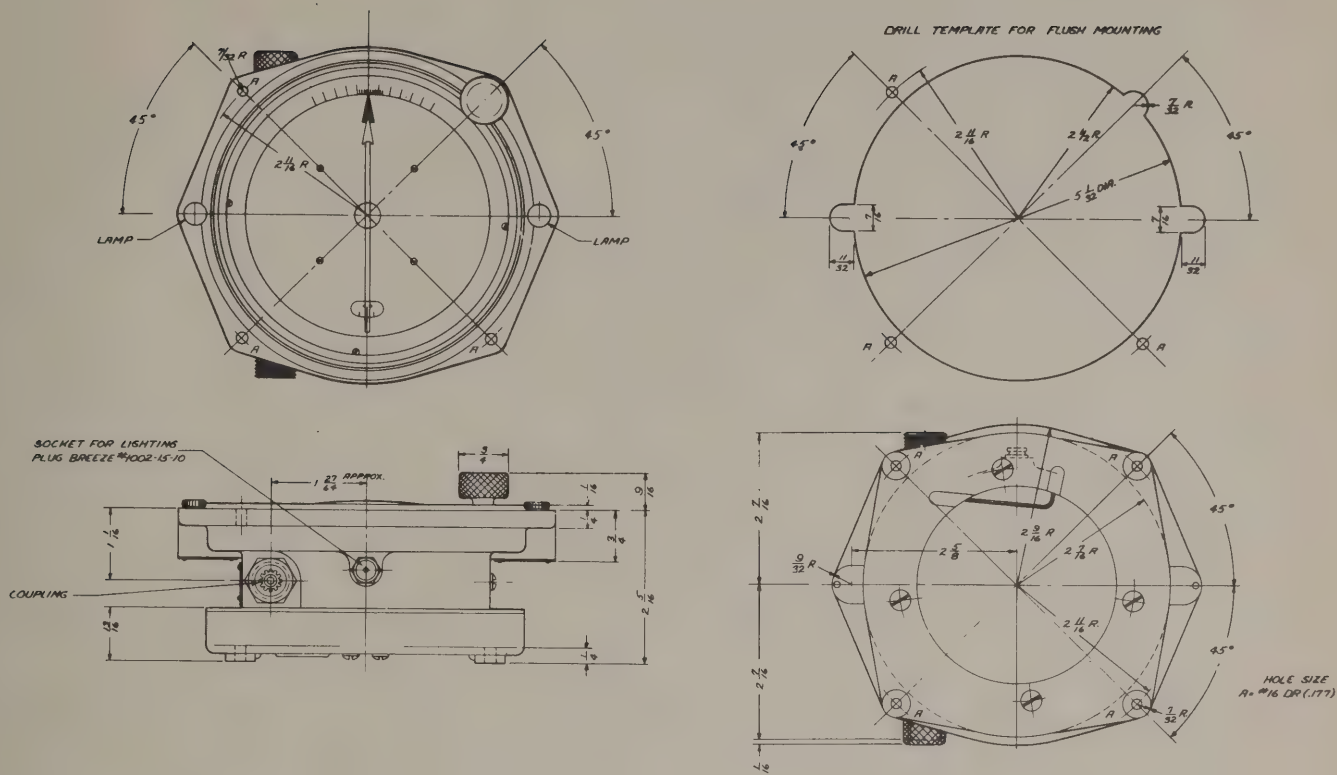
Type MN-40D Azimuth Indicator, Outline and Mounting Dimensions
